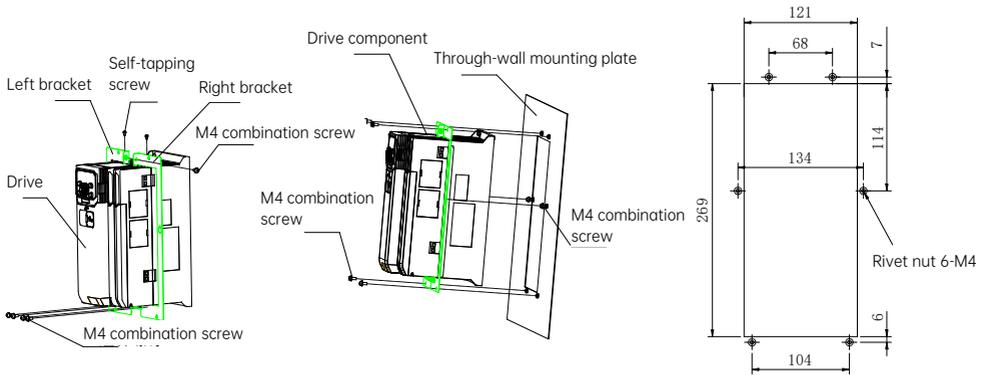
MV810-EMBC embedded mounting bracket kit
